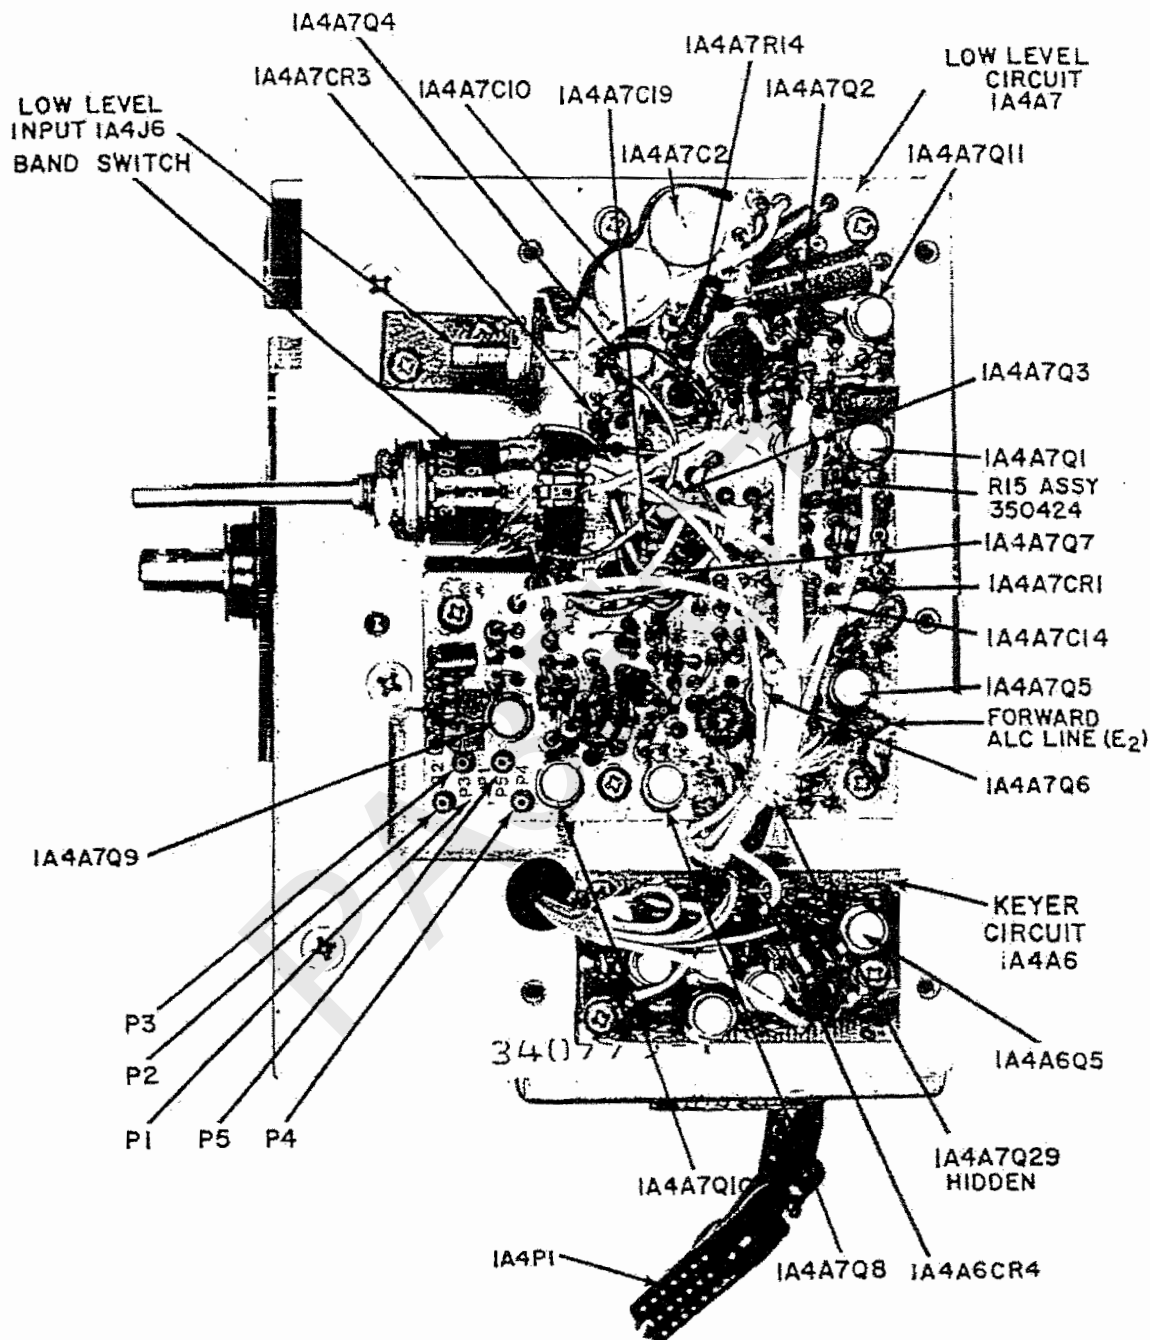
RT-224 Low Level Module and Keyer Module (shield removed)
